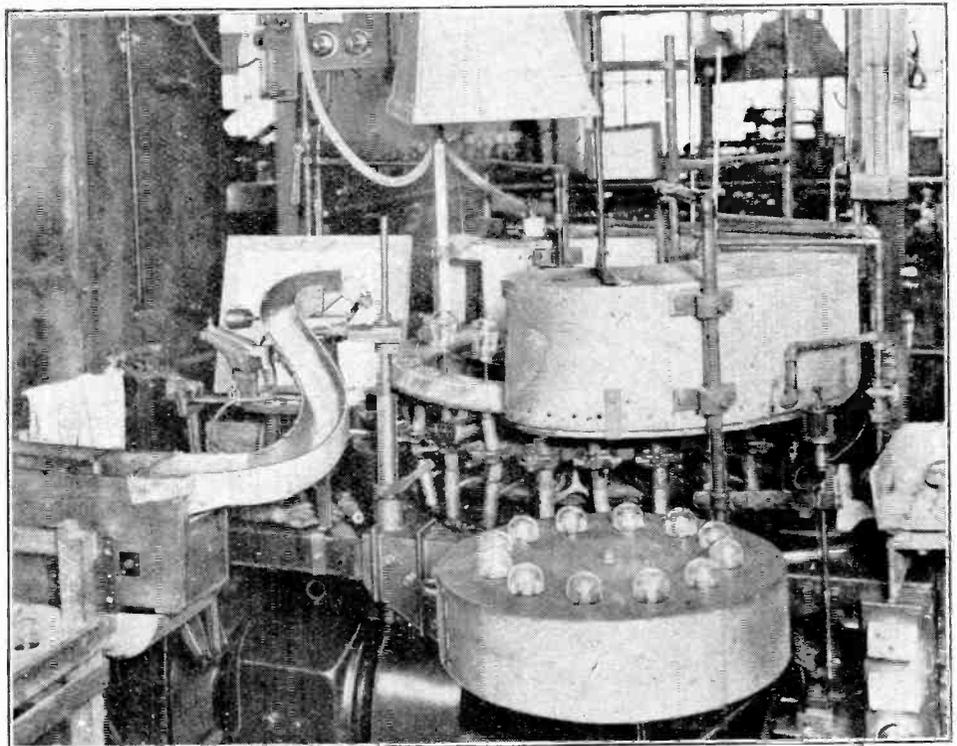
Another machine, used at the Osram Works, for pumping valves. The valves are heated in the large chamber.
